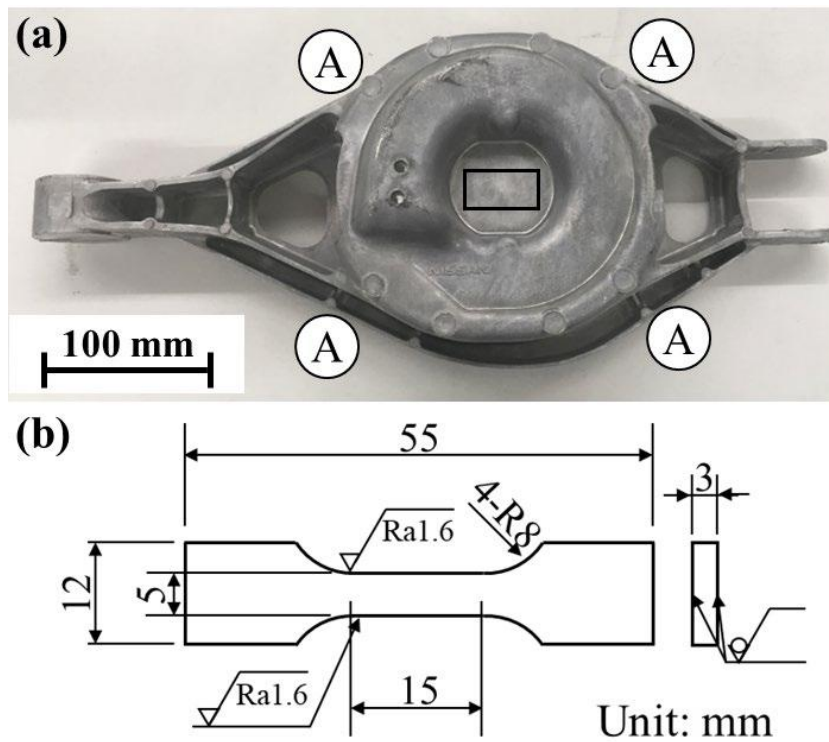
(a) Photograph of lower link arm die castings, (b) Dimension of tensile test specimen.
